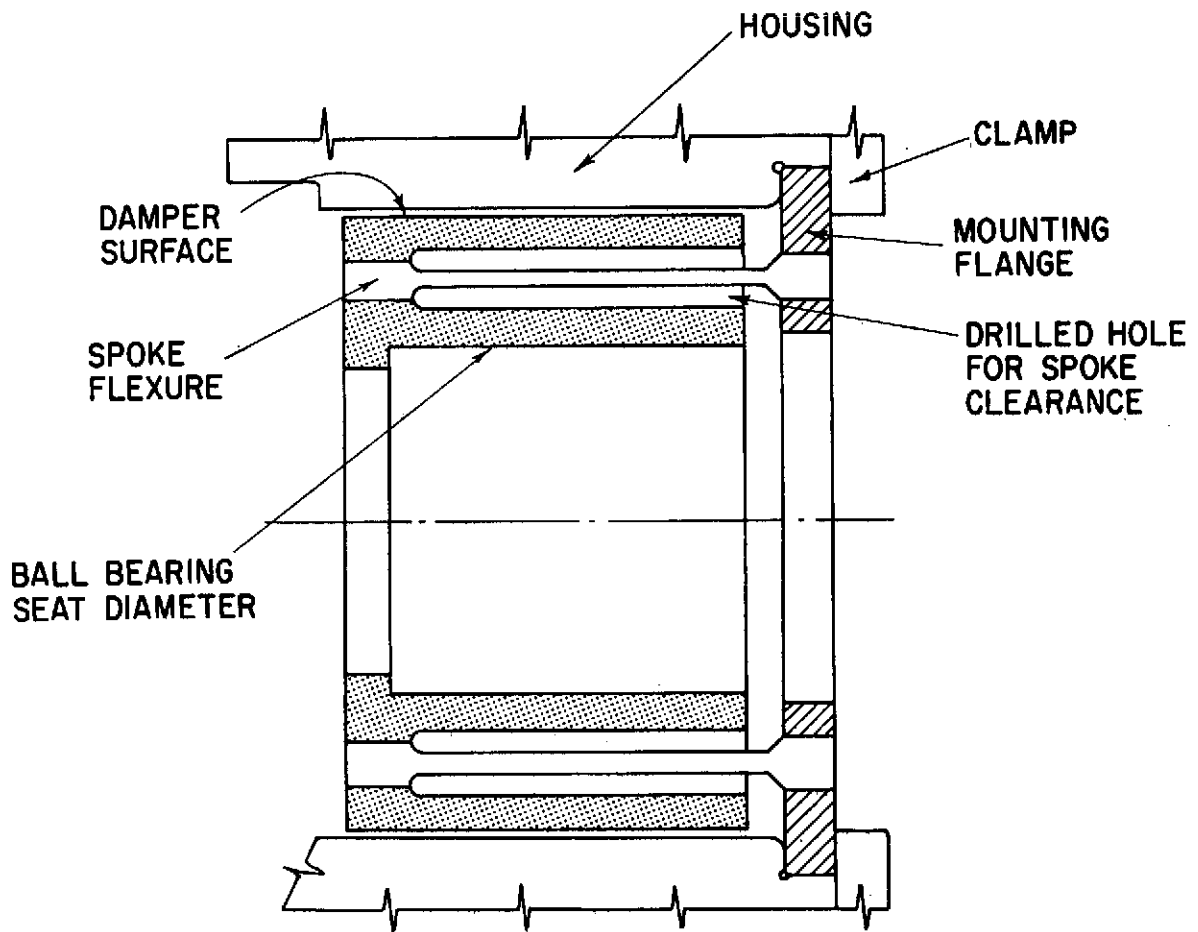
Ball Bearing Flexure Mount with Squeeze Film Damper
